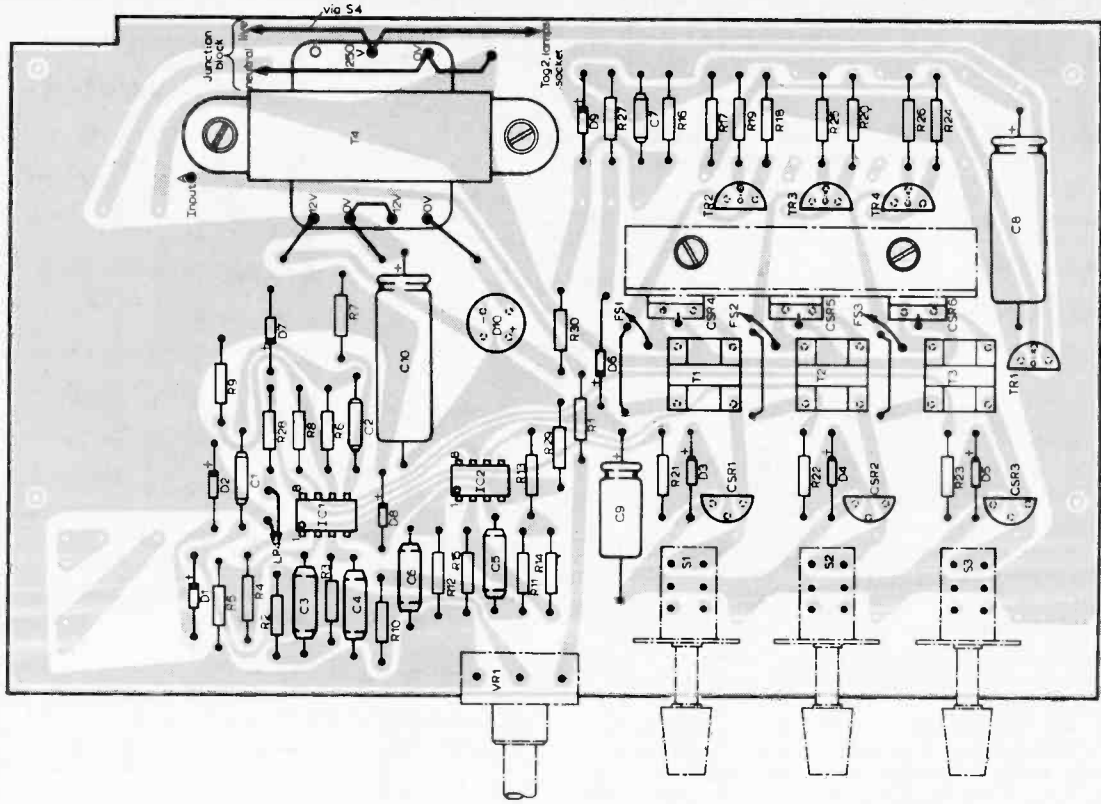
Component layout for the zero voltage version of the P.W. Tricolour on the Mk II printed circuit board. Refer to the April 73 issue for component details.
